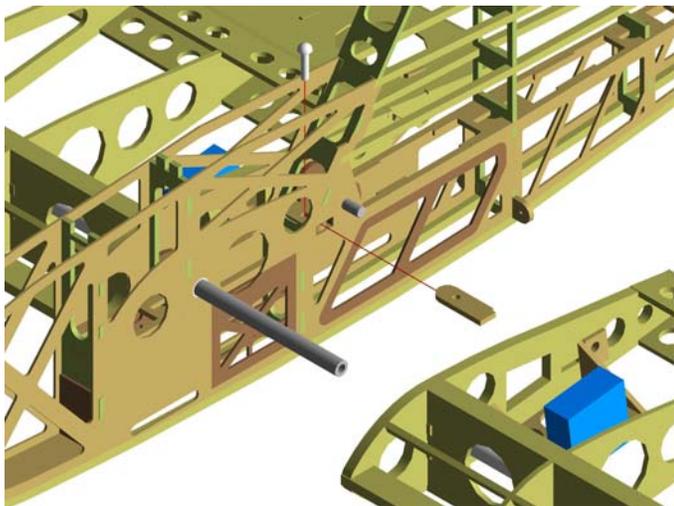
Temporarily install the carbon wing guide-pin in the fuselage. It is a good idea to taper the ends of the pin before installing. Install wing lock tabs into the fuselage, one over the other using provided #2-56 screw. *Note:* The slots in the wing are offset, be sure to match the tabs to the wing. Slide the wings into place and tack glue the tabs to the wings. Let the glue dry then remove the wing and finish gluing the tabs. Avoid applying glue where it will affect sliding the wing into the fuselage.
